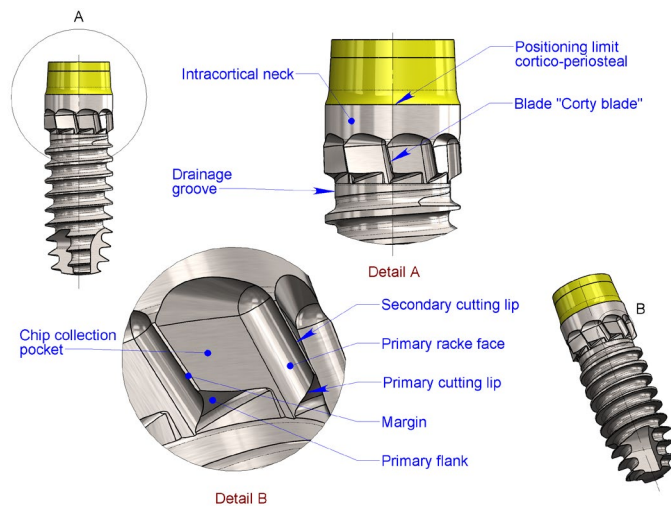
Detail of blades and drainage groove - parts nomenclature.
